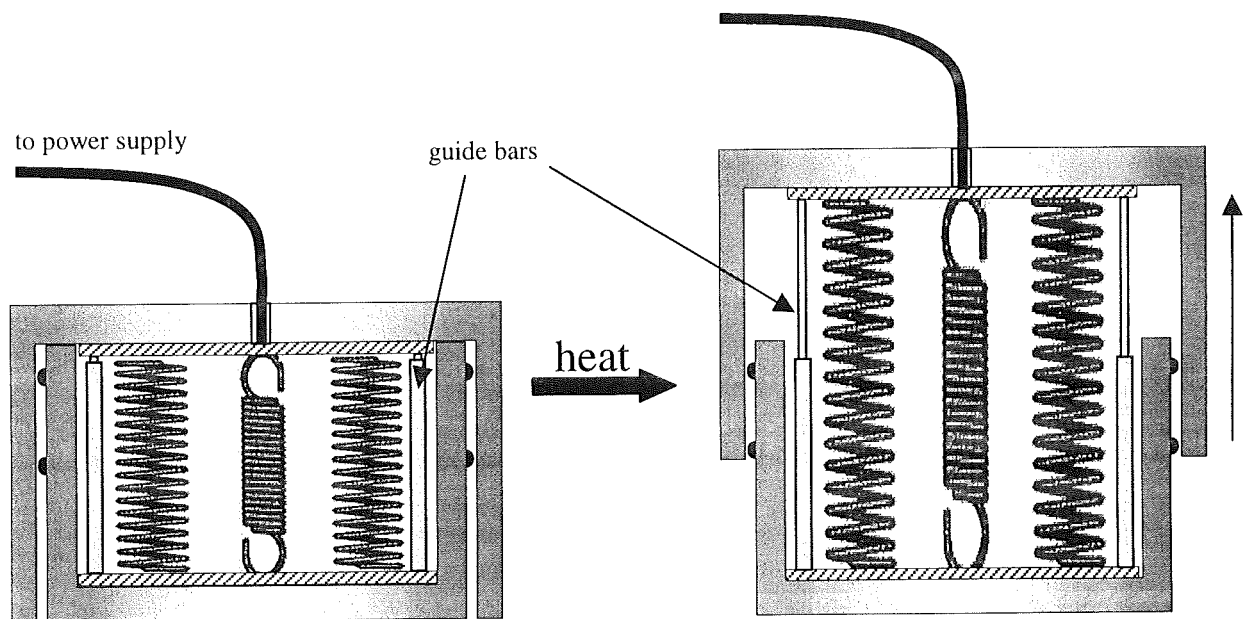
Actuator design to provide a volume change, enclosed in a two-piece aluminium assembly using o-rings to provide an effective seal.
